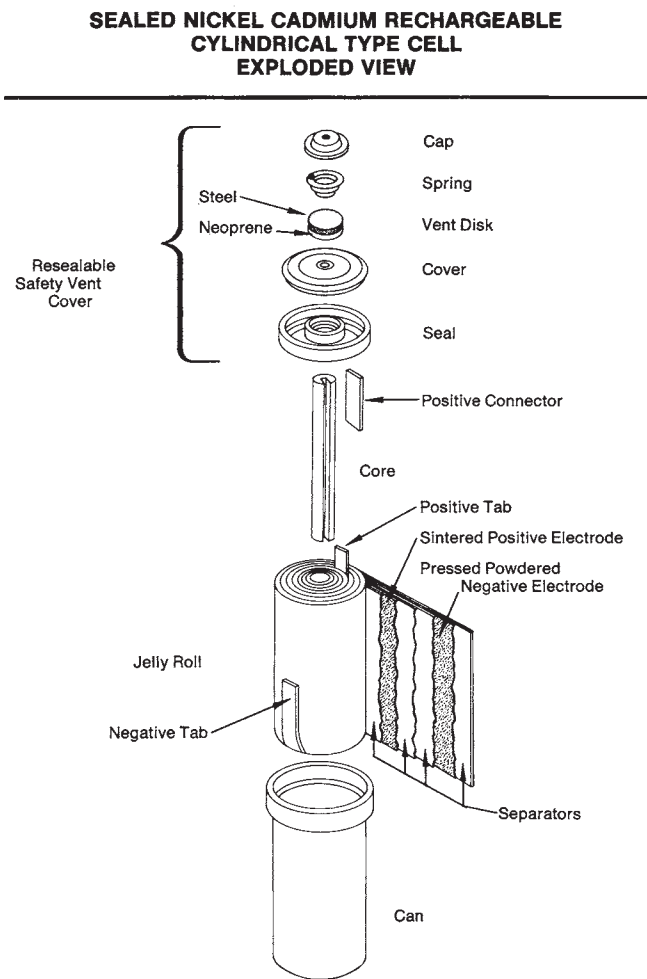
Sealed nickel-cadmium rechargeable cylindrical type cell-exploded view (Courtesy Eveready Corp.)
